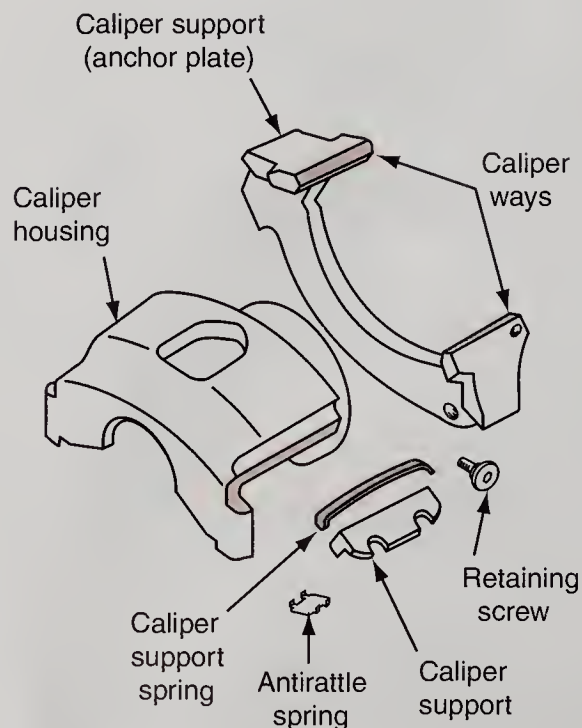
A sliding caliper moves on machined ways on the caliper support.
